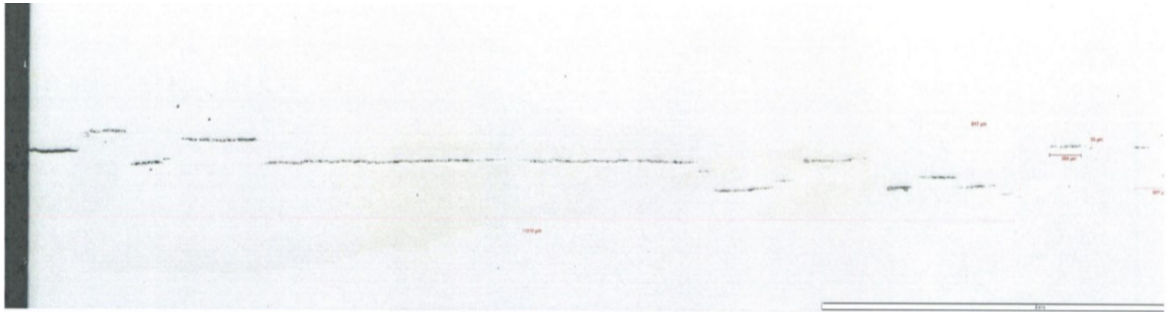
HIC test surface-crack Specimen 2, section No. 2 (Courtesy Voestalpine Tubulars)
